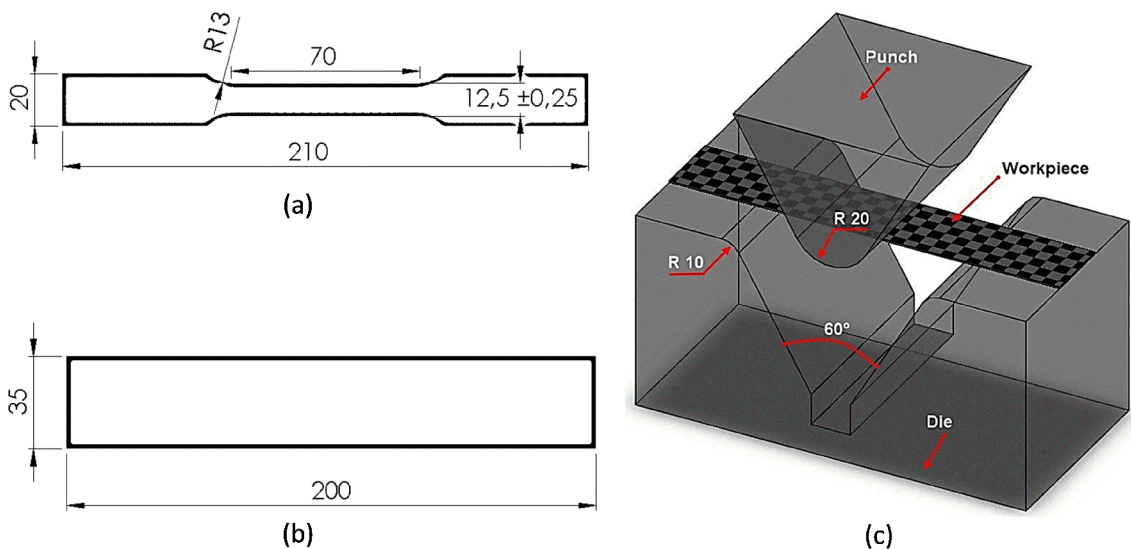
a) Tensile test, b) Bending test specimens, c) 60° V-shaped bending test setup
